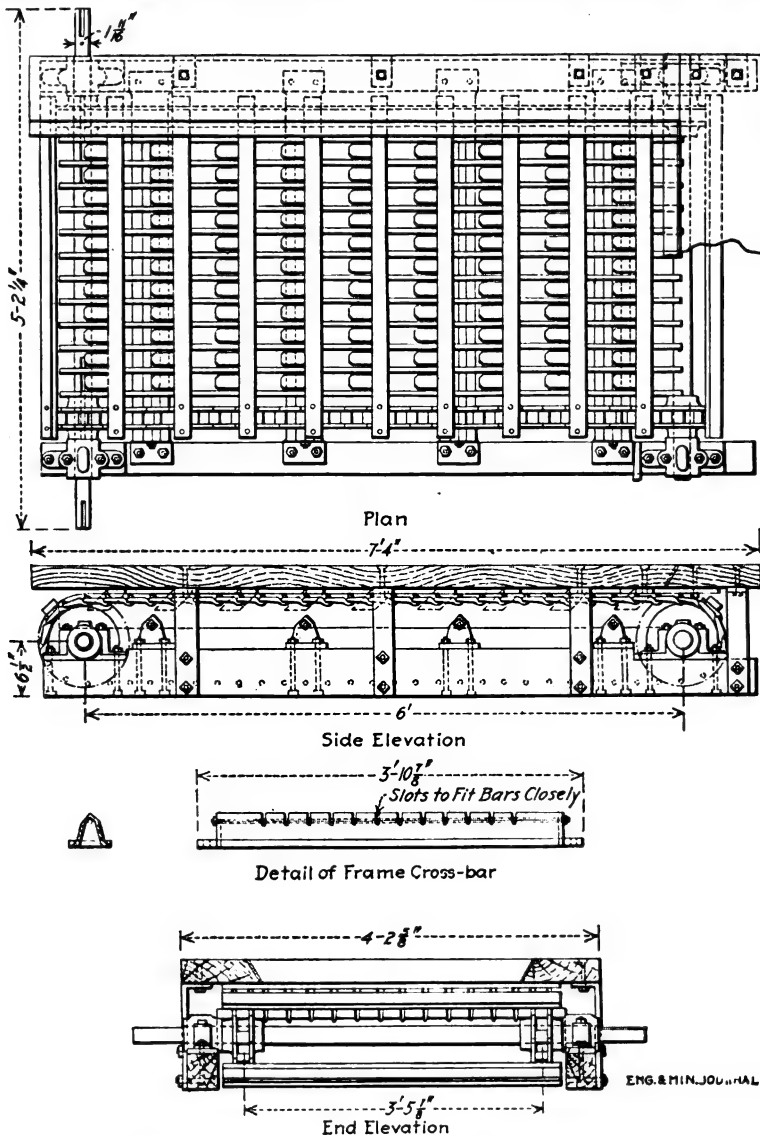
ENLARGEMENT OF THE GRIZZLY FEEDER.
